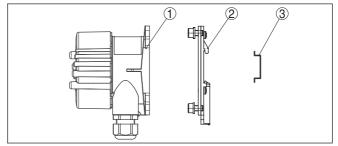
VEGADIS 82 with aluminium and stainless steel housing for carrier rail mounting
